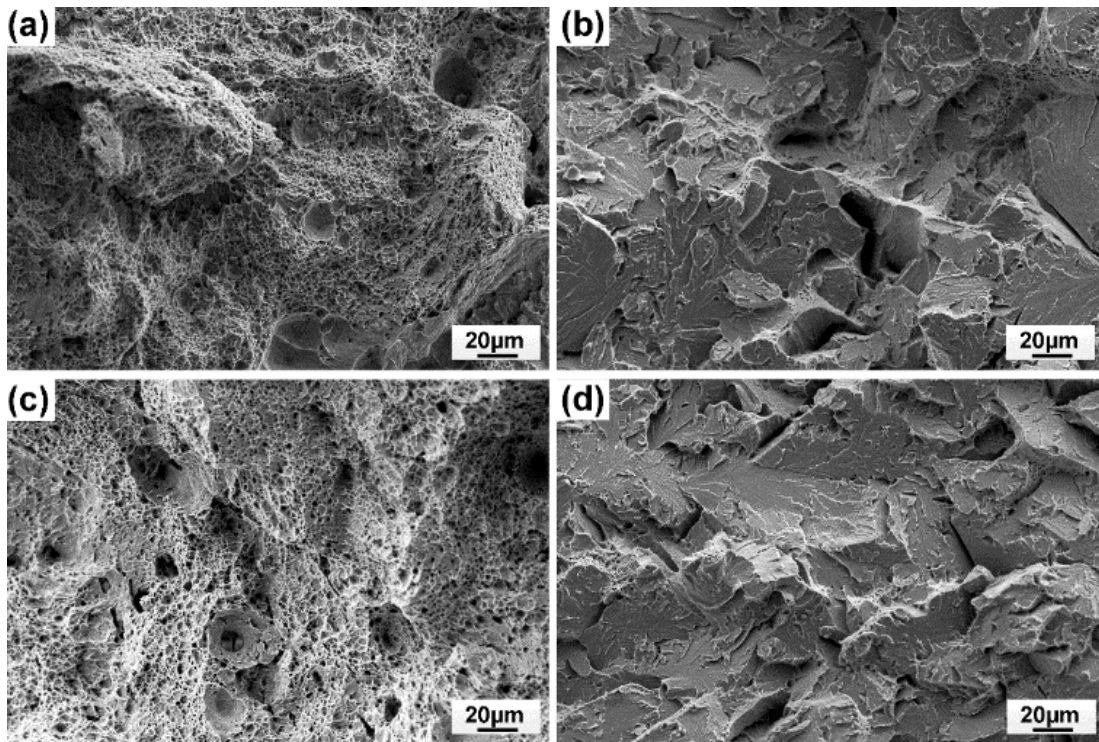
SEM images of Charpy fracture surfaces of samples tested at -20 °C: (a) autogenous laser weld, near the notch; (b) autogenous laser weld, towards the middle; (c) cold-wire laser weld with a WFR of 12 m/min, near the notch; (d) cold-wire laser weld with a WFR of 12 m/min, towards the middle.
